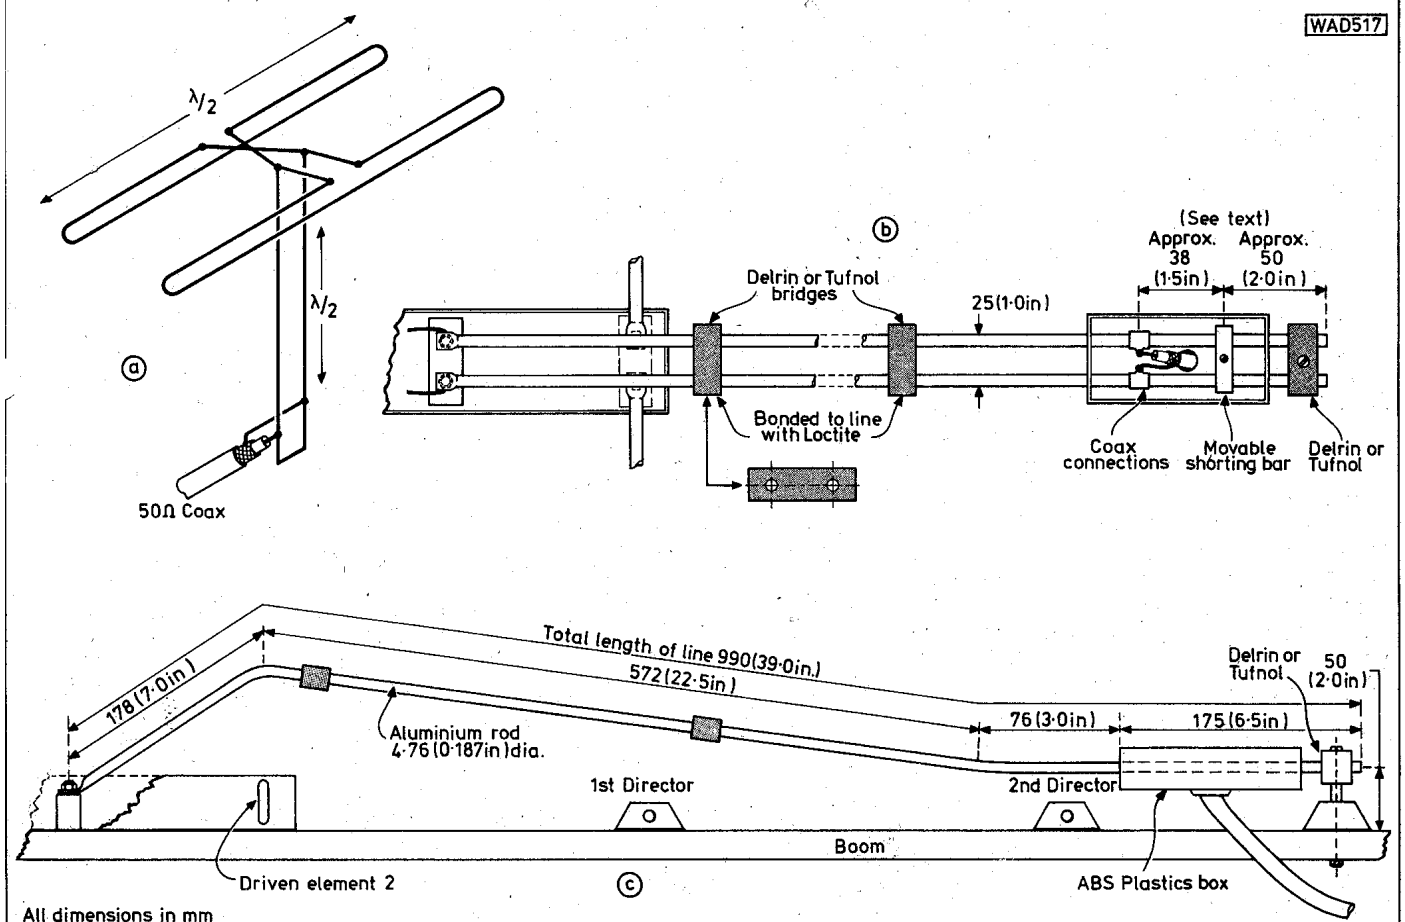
(a) Method of half-wave line match to primary radiators. (b) Top view of matching line assembly. (c) Side view
